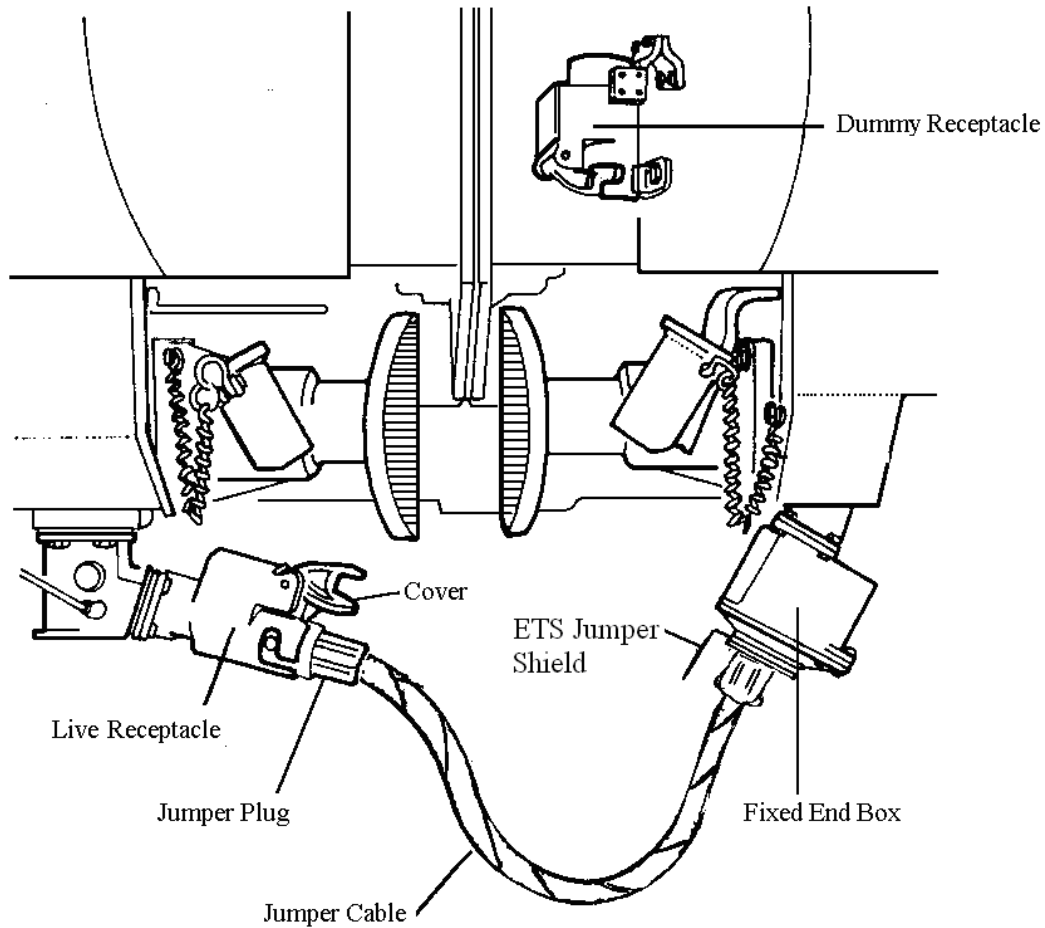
ETS Jumper Equipment showing Location of Jumper Shield
